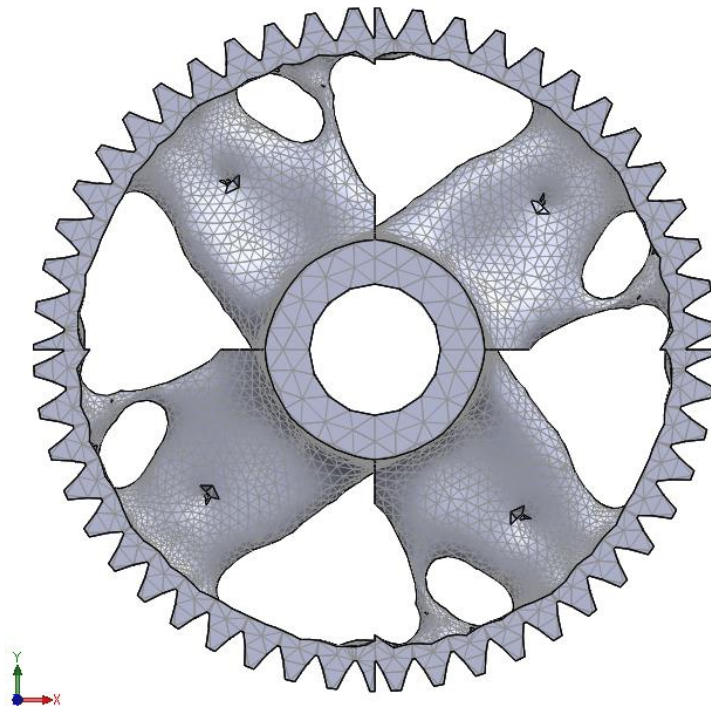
Entire gear composed by the assembly of four quarter optimized gears
